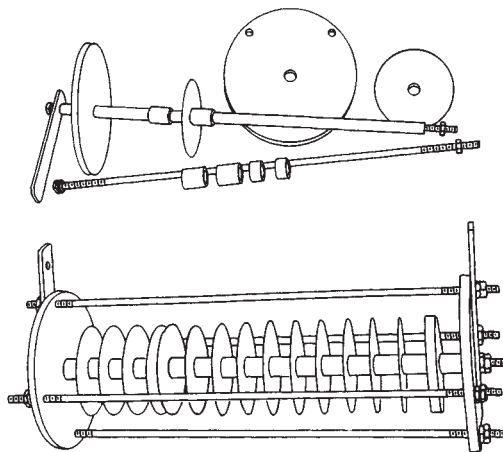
Assembly of a corrosion-test spool and specimens. (Mantell, ed., Engineering Materials Handbook, McGraw-Hill, New York, 1958.)
